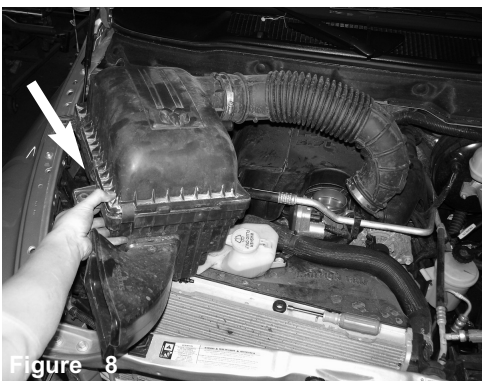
Lift factory air box cleaner and pull entire air box and air duct assembly out of engine bay.
